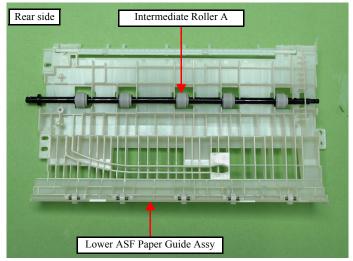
Removing the Lower ASF Paper Guide Assy (4)
